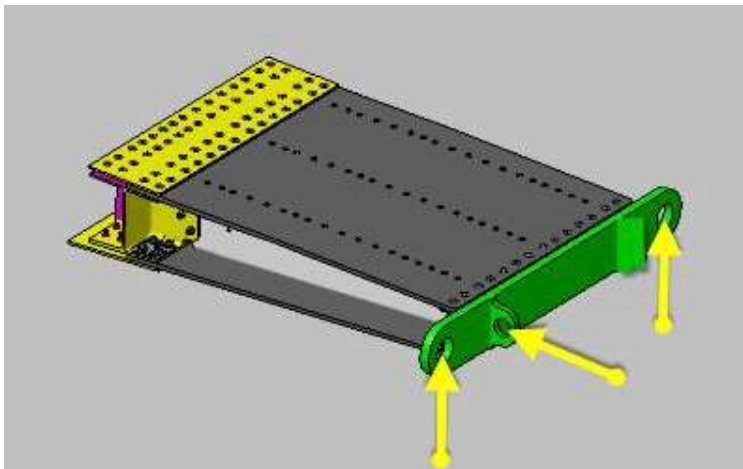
The component test “Wing to fuselage joint at $Y_{85}=2000$ incl. bulkhead flanges”. The figure shows the part of the test specimen outside the wing joint.
